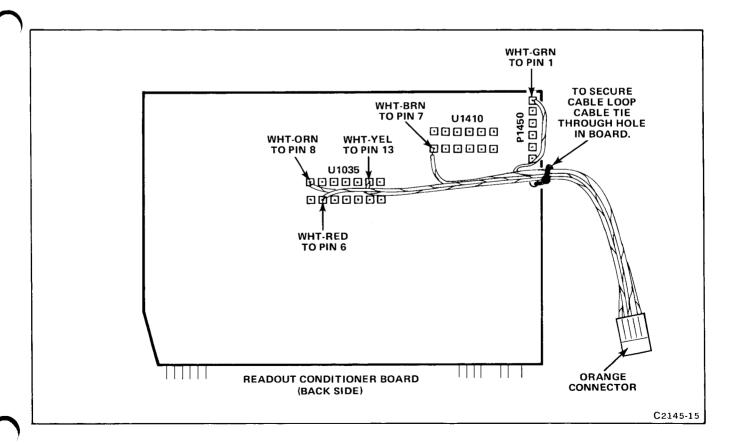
Adding 5-wire cable to 414 Readout Conditioner board.
